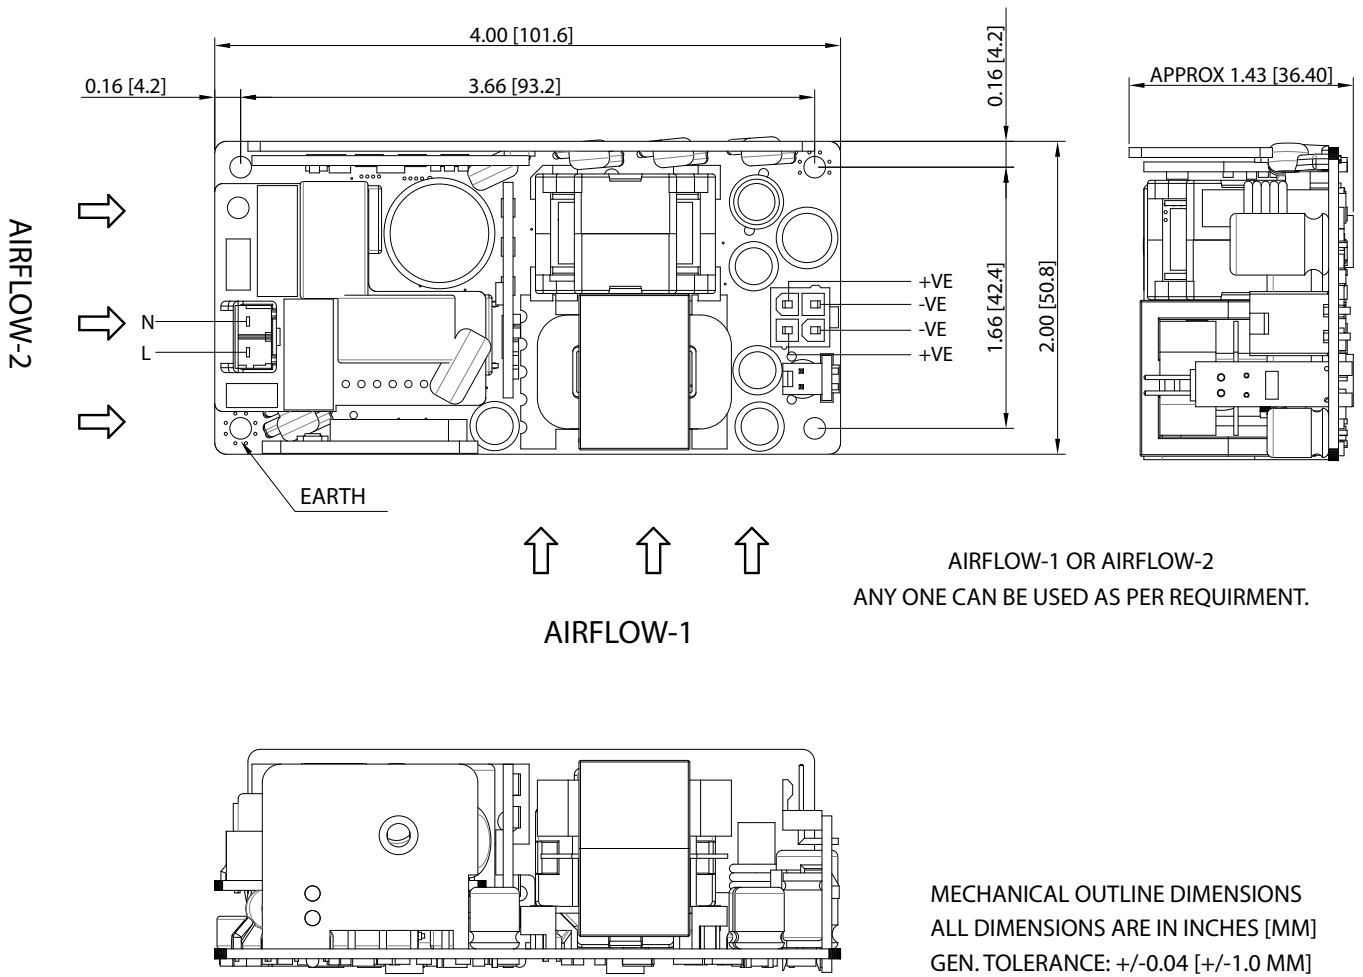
Mechanical Drawing – MEPG300-1XXX-G models
